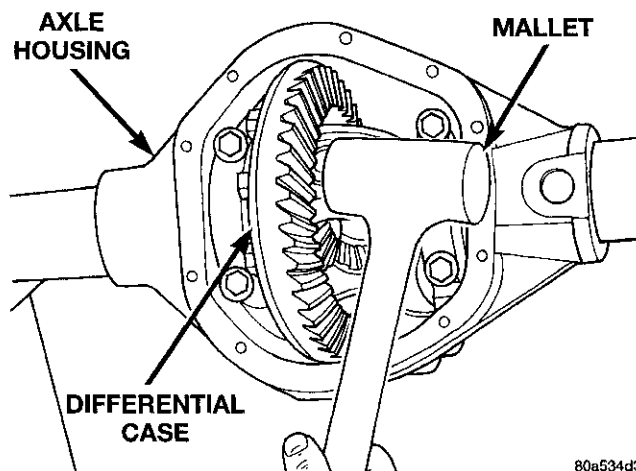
Seat Ring Gear Side Differential Dummy Side Bearing
